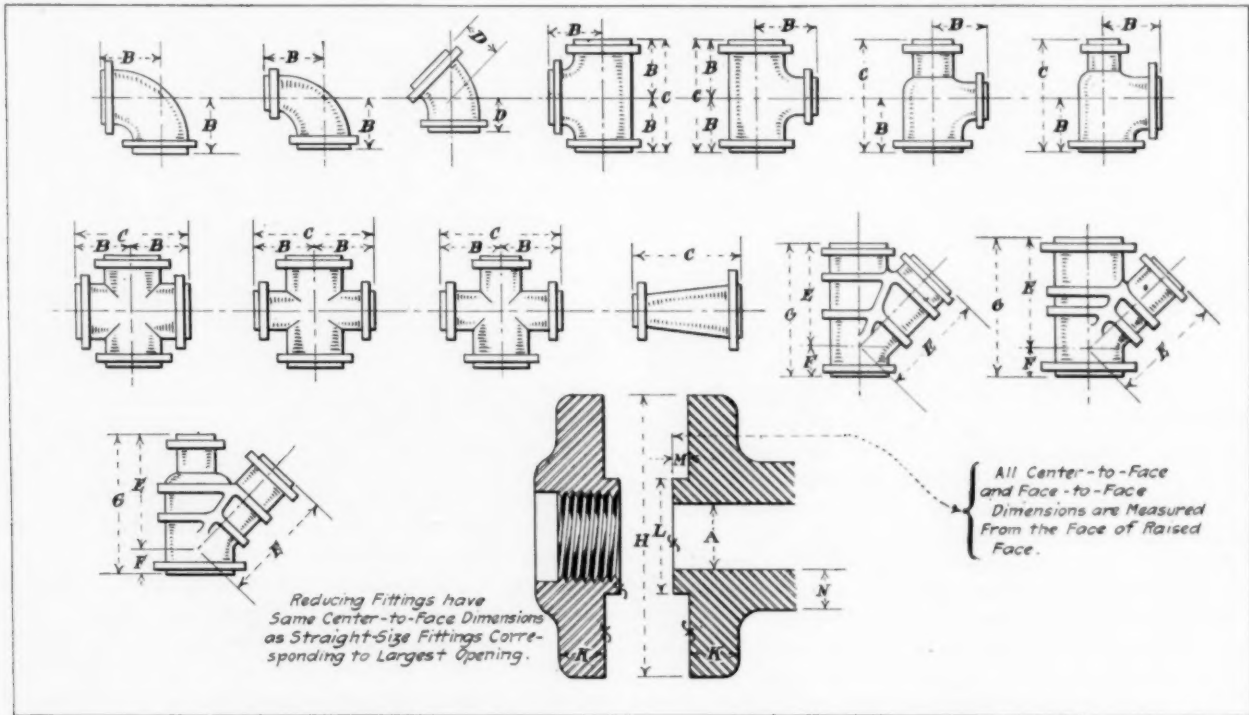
HYDRAULIC AMERICAN STANDARD FLANGES AND FLANGED FITTINGS DIMENSIONED IN TABLES 2, 3 AND 4
